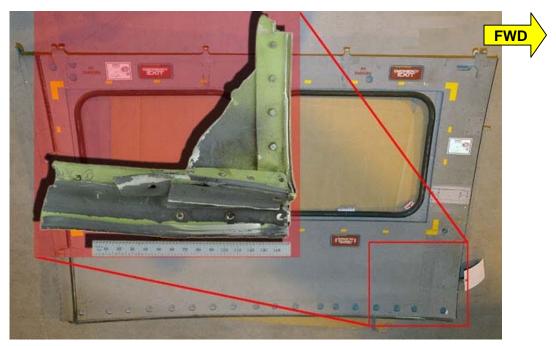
Inboard surface of recovered lower fwd corner of the LH cargo door.
